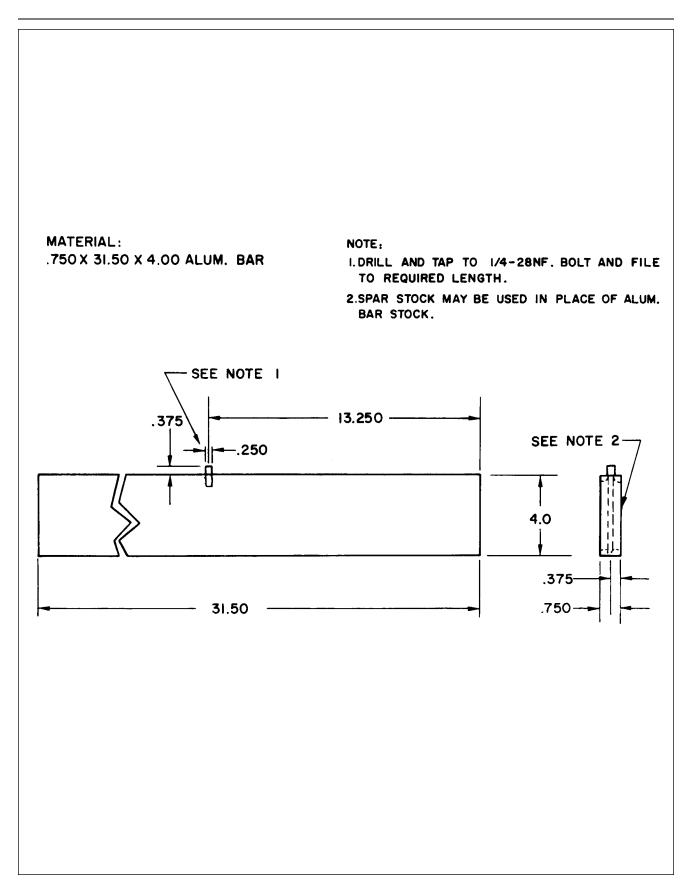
Fabricated Aileron and Flap Rigging Tool
